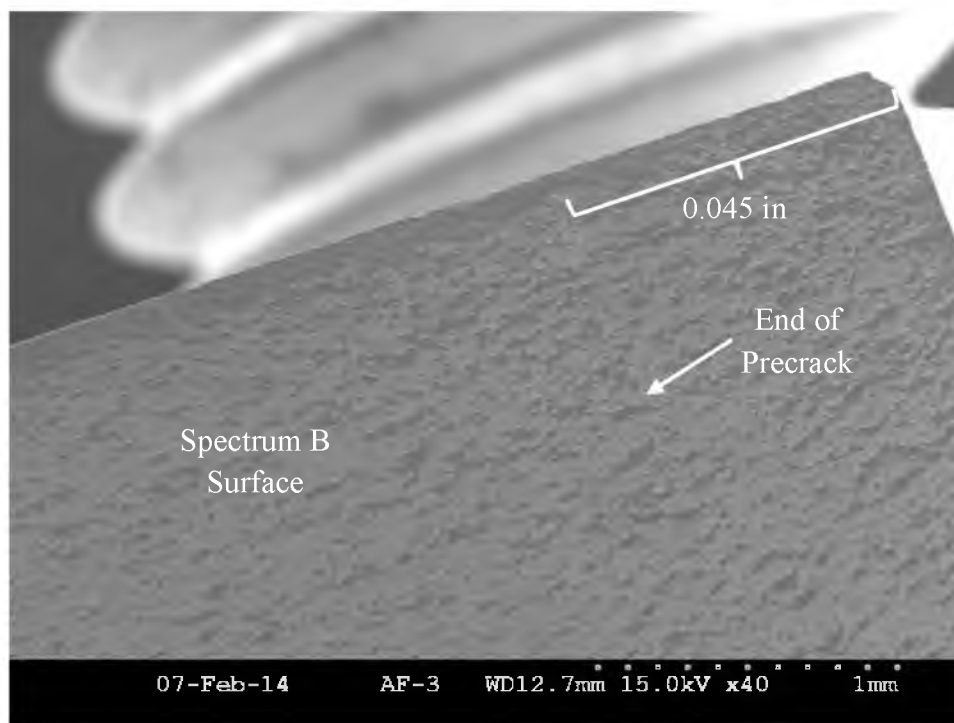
Wide View of GT270-28 Fracture Surface
